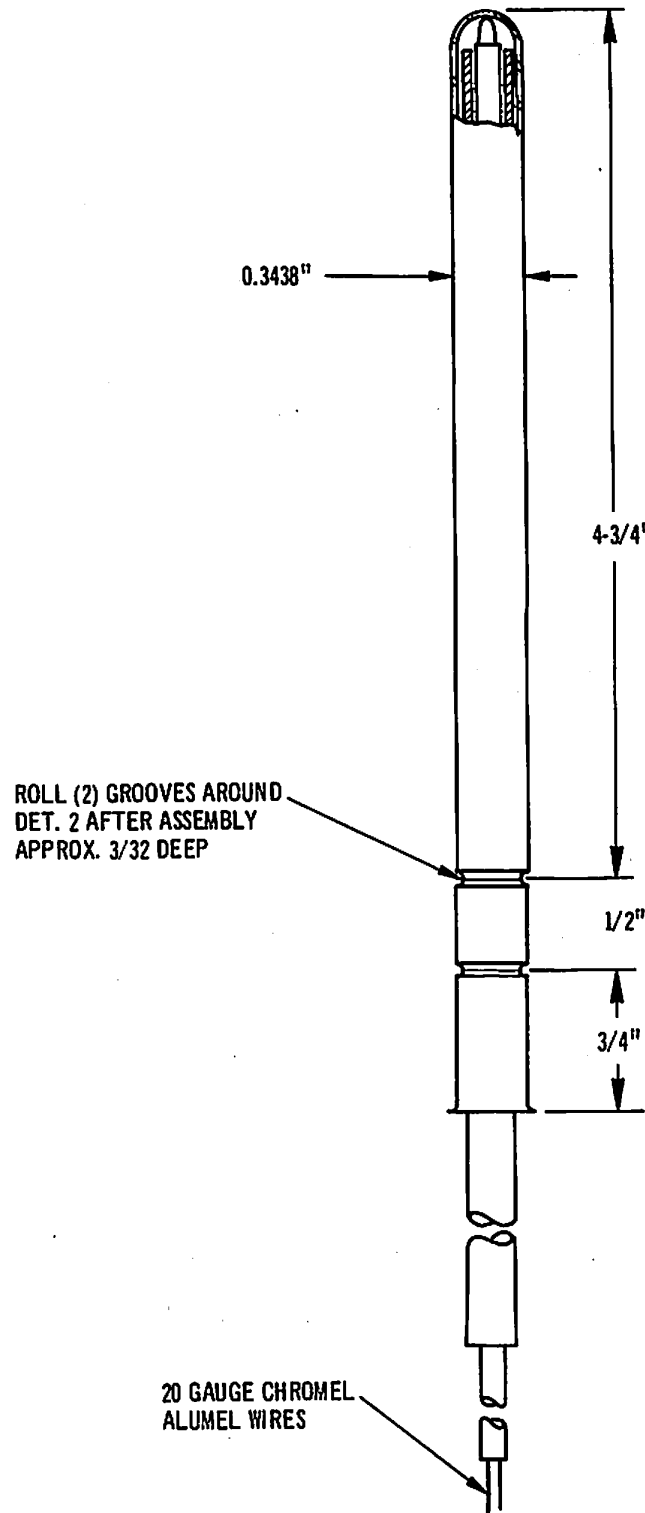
Figure 6.9-7 Special Thermocouple Assembly [Vol. II, Chapter 6, p.6.9-11]
